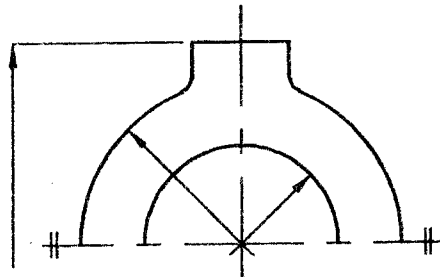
Dimension lines on partial view of a symmetrical part
